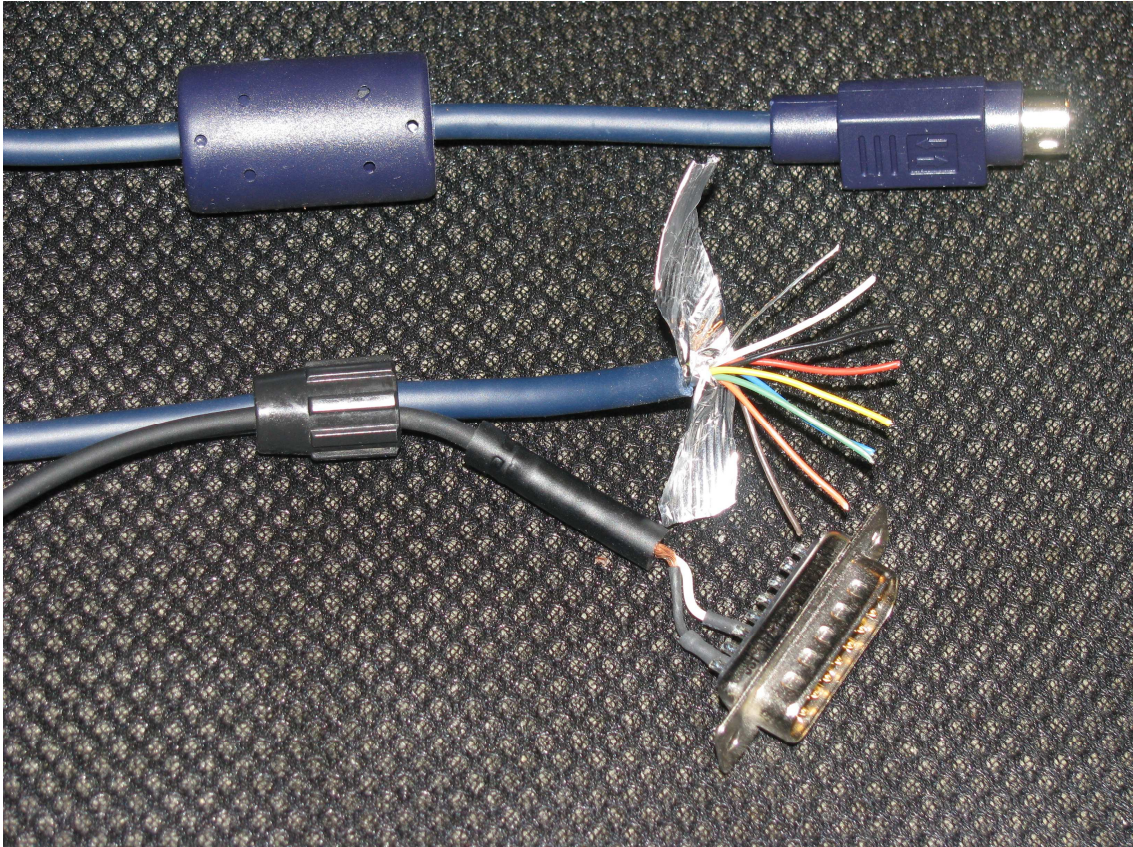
Mini DIN8 double plug HQ DAP Audio Cable cut off on one side and prepared for soldering to DB15 VL-1000 connector.
